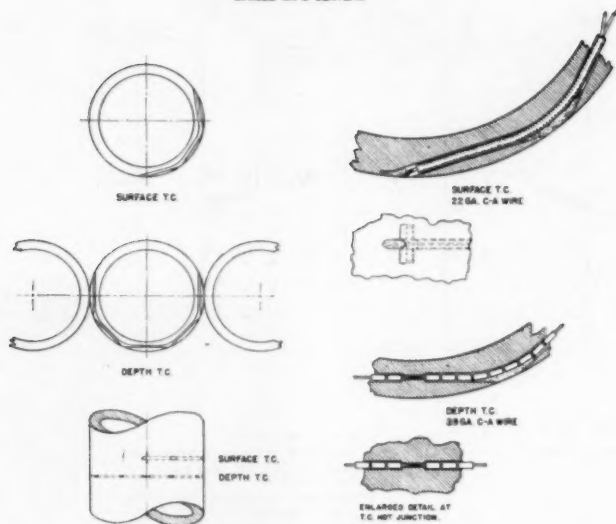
DETAILS OF GRADIENT THERMOCOUPLES
